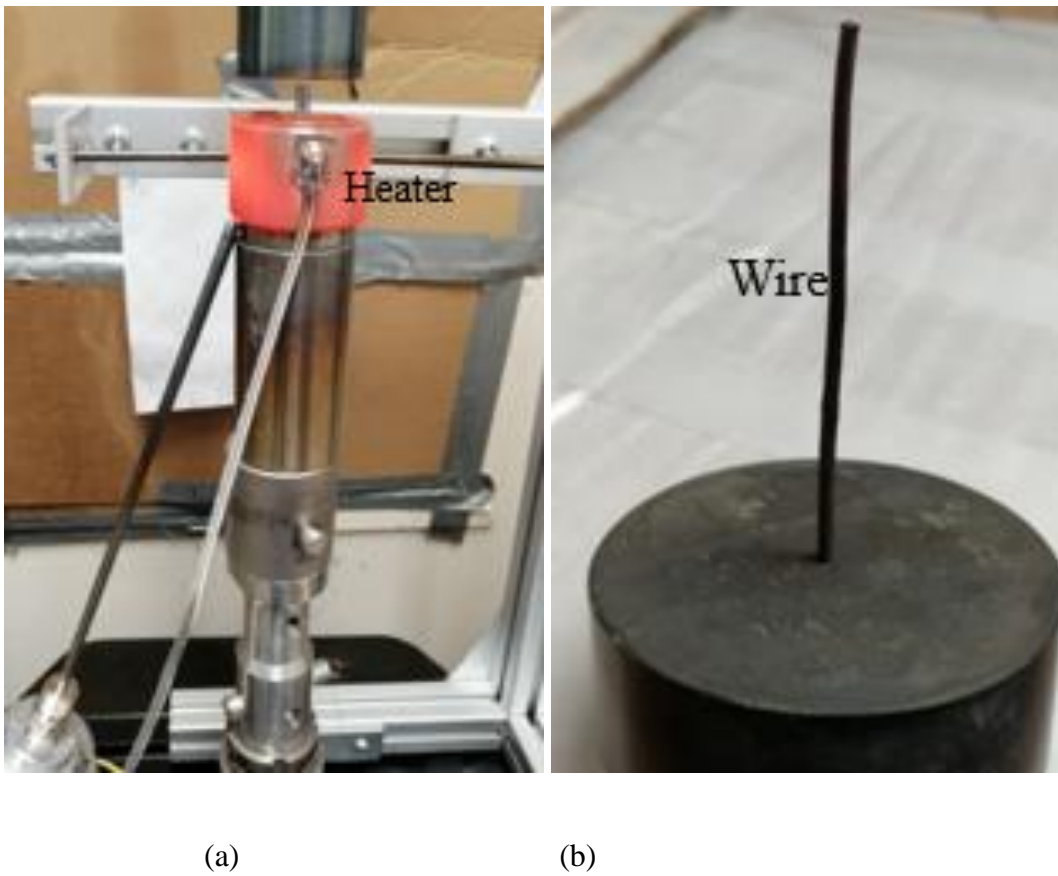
(a)Cu extrusion die and test setup. (b) Extruded wire sample.
